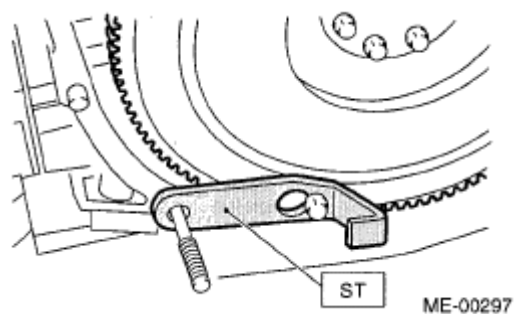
Locking Crankshaft Using Crankshaft Stopper ST (498497100)- MT Model
